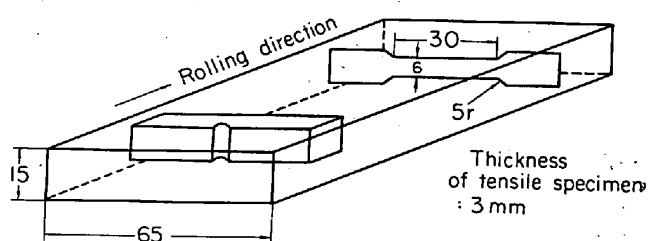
Dimensions (mm) and directions of specimens for Charpy impact and tensile tests.
